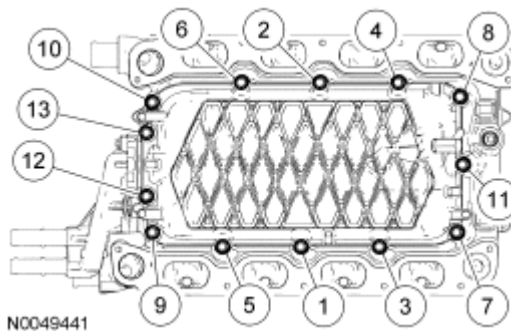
Positioning Gasket Lower Intake Manifold Cover & Tightening Bolts In Sequence
